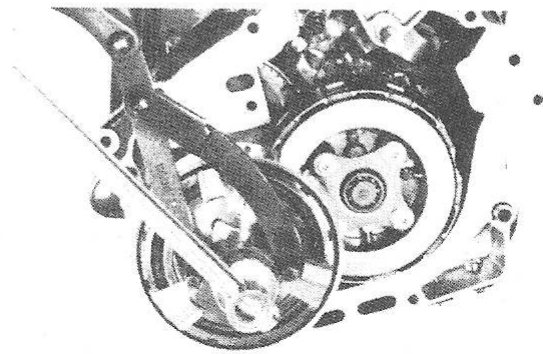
B.24 Loosening the primary clutch retaining nut (the shoe assembly must be kept from turning) (Sec 13)
